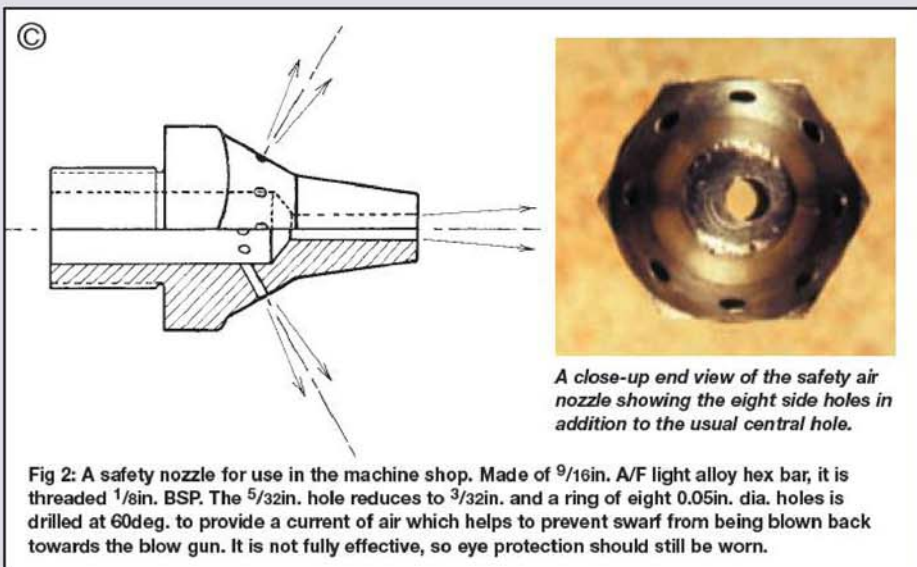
A safety nozzle for use in the machine shop. Made of $\frac{9}{16}$ in. A/F light alloy hex bar, it is threaded $\frac{1}{8}$ in. BSP. The $\frac{5}{32}$ in. hole reduces to $\frac{3}{32}$ in. and a ring of eight 0.05in. dia. holes is drilled at 60deg. to provide a current of air which helps to prevent swarf from being blown back towards the blow gun. It is not fully effective, so eye protection should still be worn.
